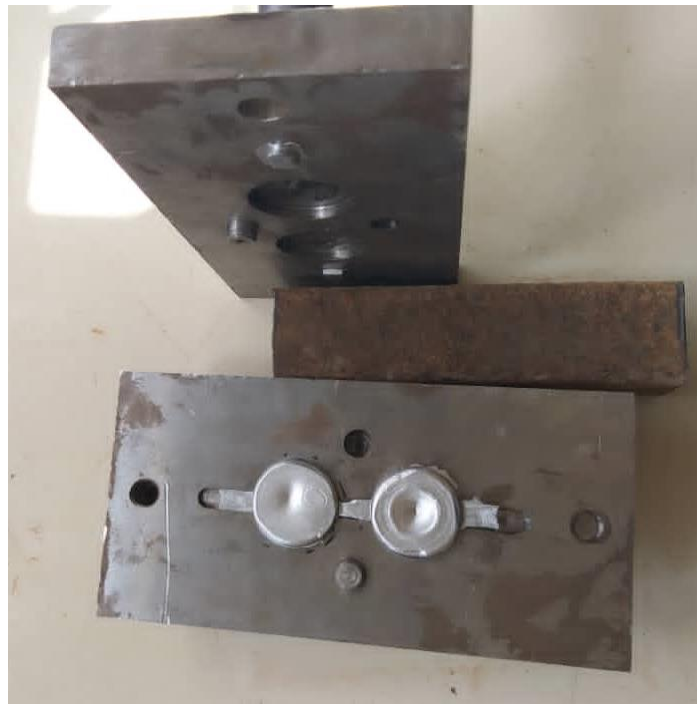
Complete filling after pouring the molten metal into the preheated mold.
